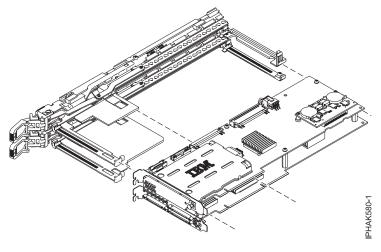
Pulling the double-wide adapter away from the cassette assembly
